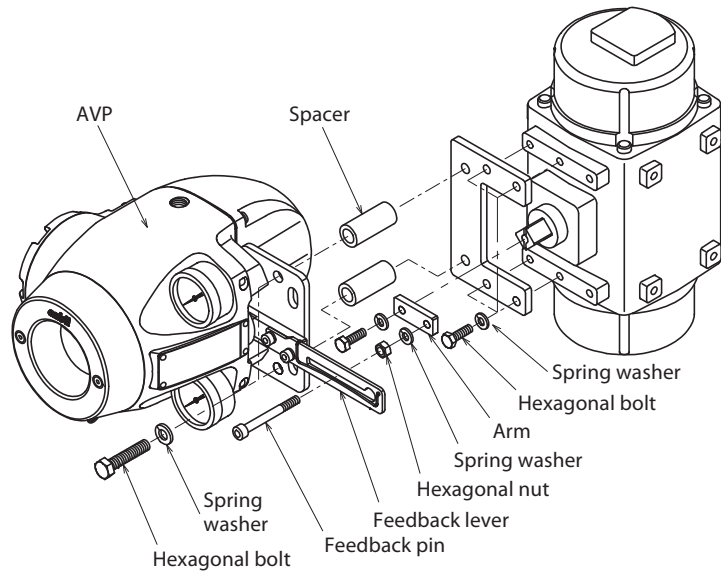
Mounting Procedure for Double-Acting Rotary Cylinder Actuator
